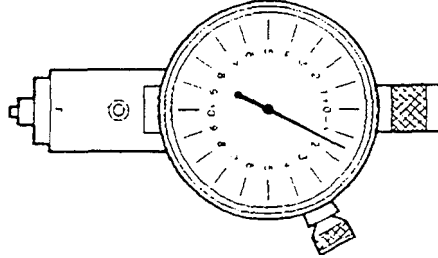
Gaging a 3.5 mm Male Connector Using a Screw-on Type Gage
